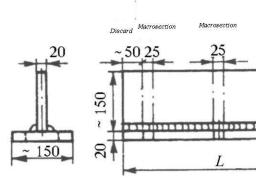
Tee-joint testing for tests of electrodes for fillet joint welding
